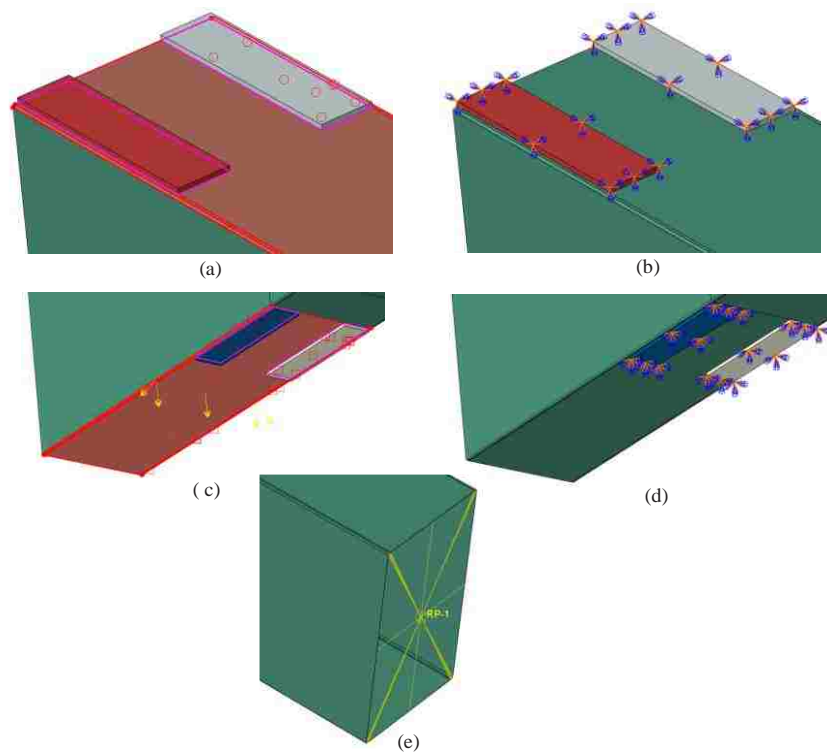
(a) Inner beam-top wearpad frictional interaction (b) Top wearpad encastre (c) Inner beam-bottom wearpad frictional interaction (d) Bottom wearpad encastre (e) reference point coupling with inner beam tip
